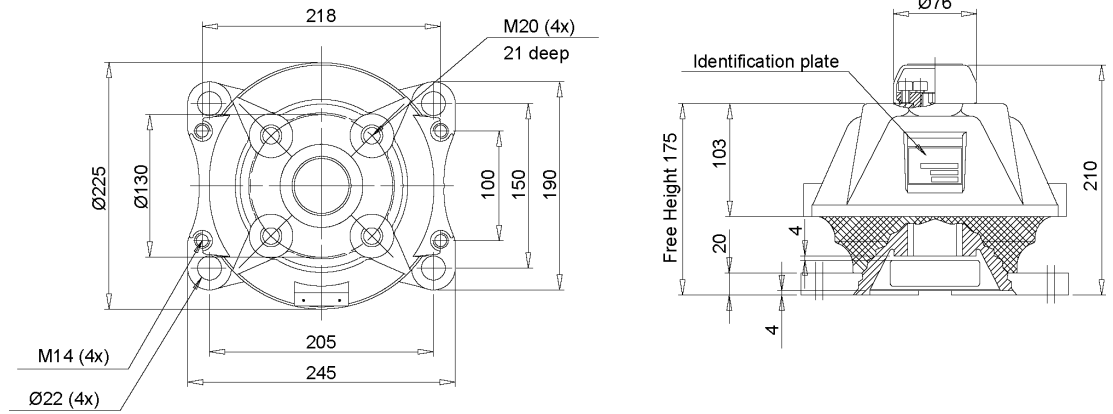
Rubber mount, In-line engines (DAAE004230c)
